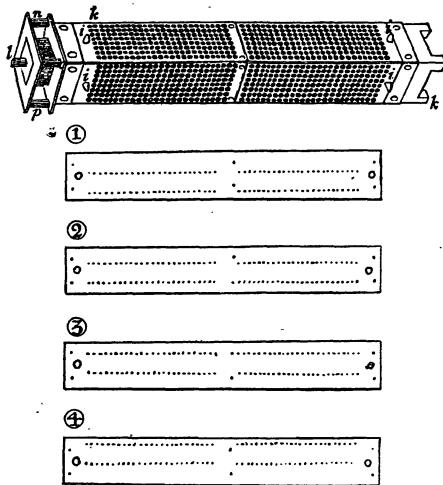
JACQUARD CYLINDER AND CARDS.
